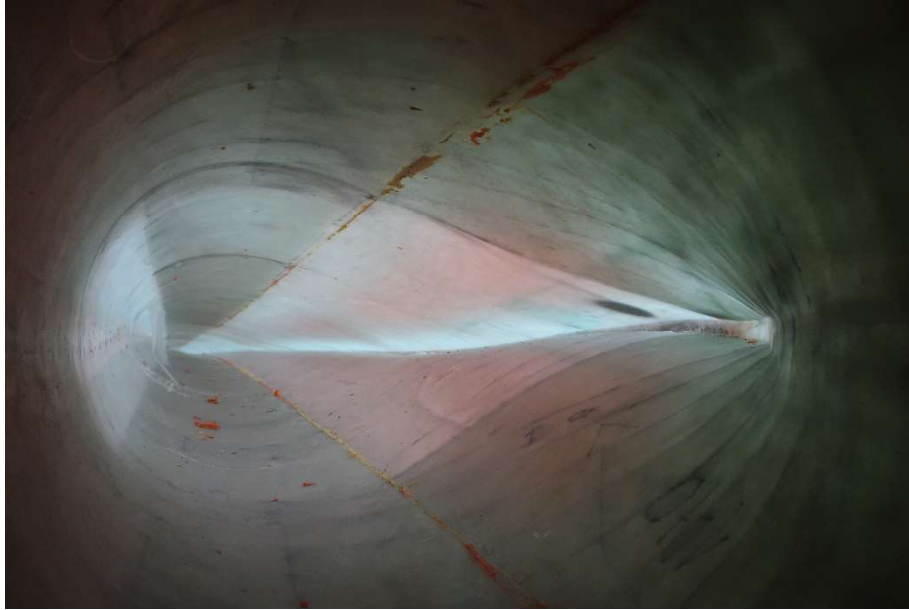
Inner view of an innovative GFRP wind turbine blade entirely molded in only one piece
